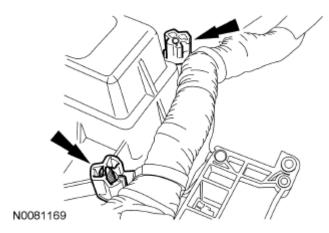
Locating Wiring Harness Retainers And LH Side Valve Cover Stud Bolts Courtesy of FORD MOTOR CO.
